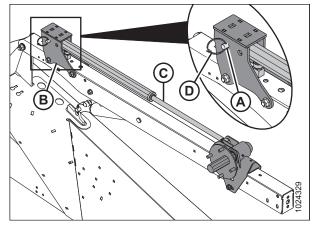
Left Reel Arm Cylinder in Aft Position
